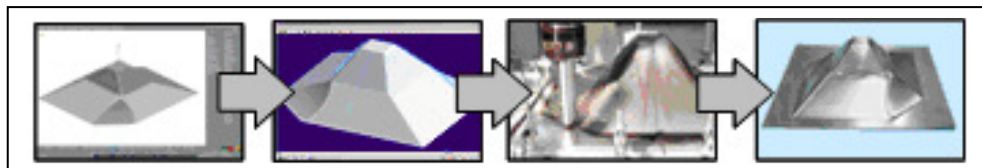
Process of incremental Sheet forming, Cad Model, Generation of the tool path, shaping and the completed element, Institute of Metal Forming, RWTH Aachen University
